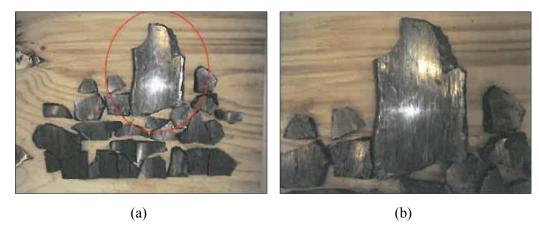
Broken cylinder liner. Picture (a) shows inner surface of broken liner and picture (b) is an enlargement of the red circle in (a). Courtesy of [25]
